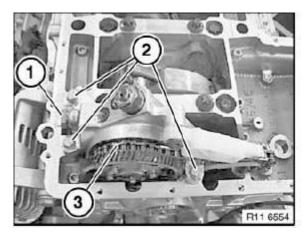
Identifying VANOS High-Pressure Pump Courtesy of BMW OF NORTH AMERICA, INC.
